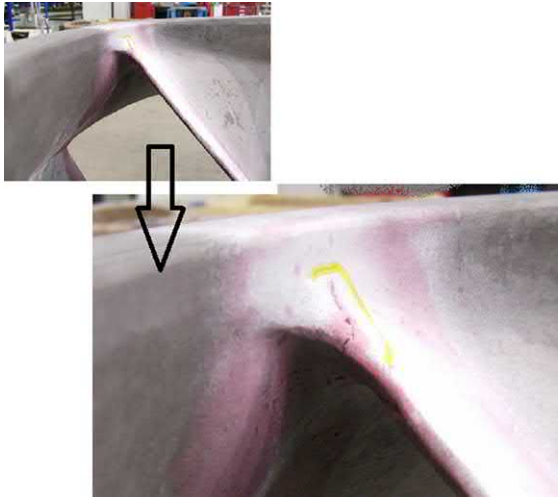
Micro cracking at the intersection with the impeller outer shroud.
